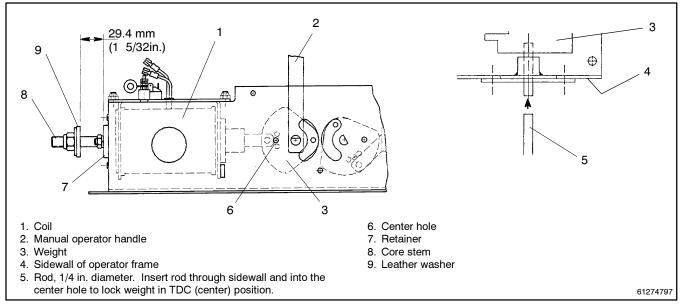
Rod Inside of Solenoid Operator Weight (shown on its side)
